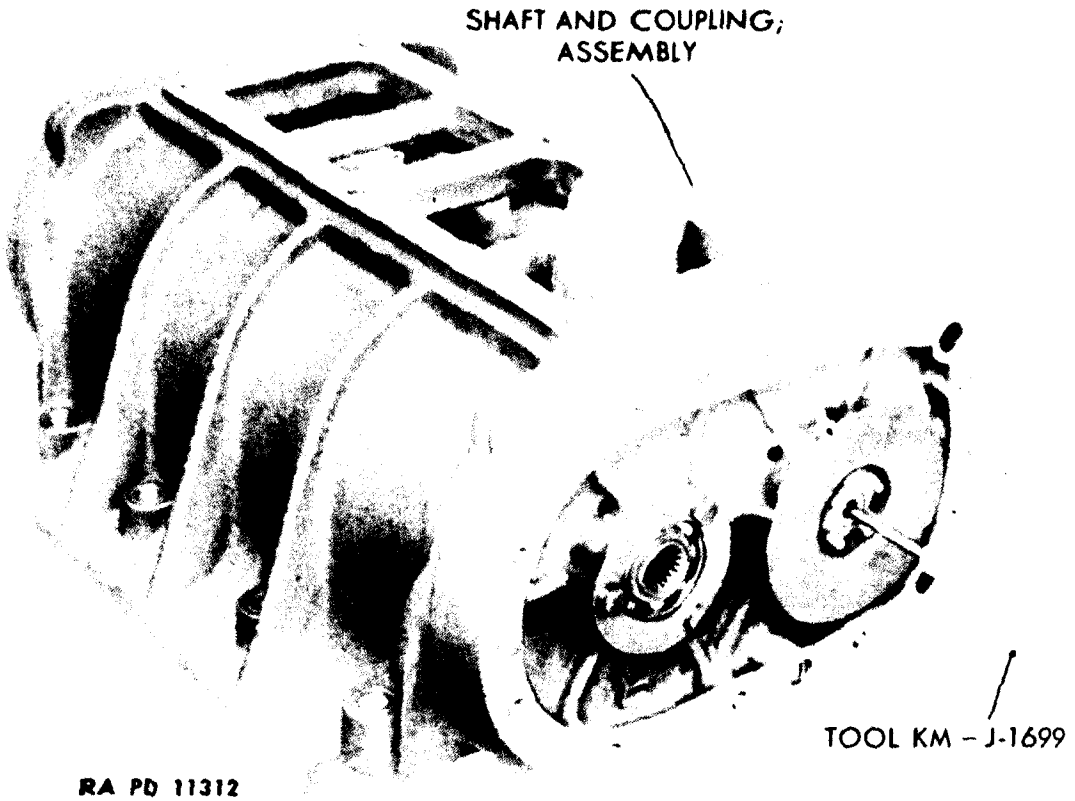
Removing Water Pump Shaft and Coupling Assembly
